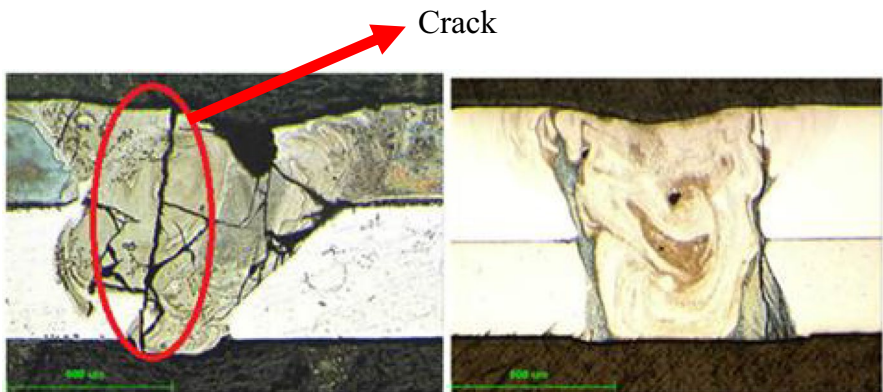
NiTi and stainless-steel welding with stainless-steel interlayer (a) Formation of crack. (b) Uniform weld pool [49]
